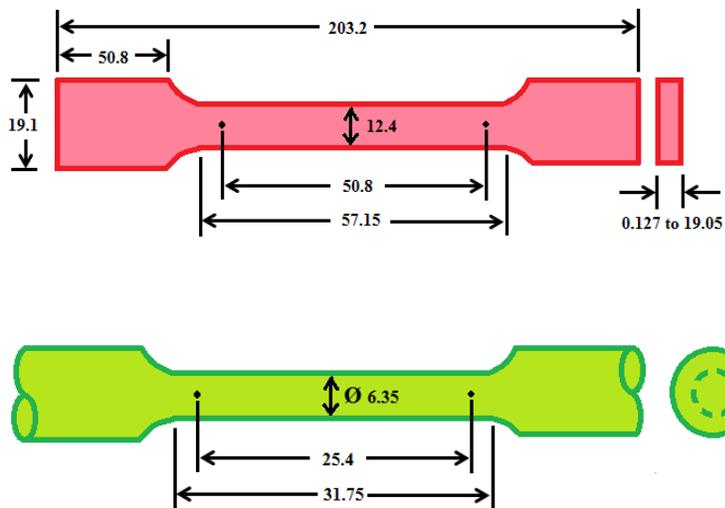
Standard (ASTM E8) Tensile Specimens of plate and cylindrical types
